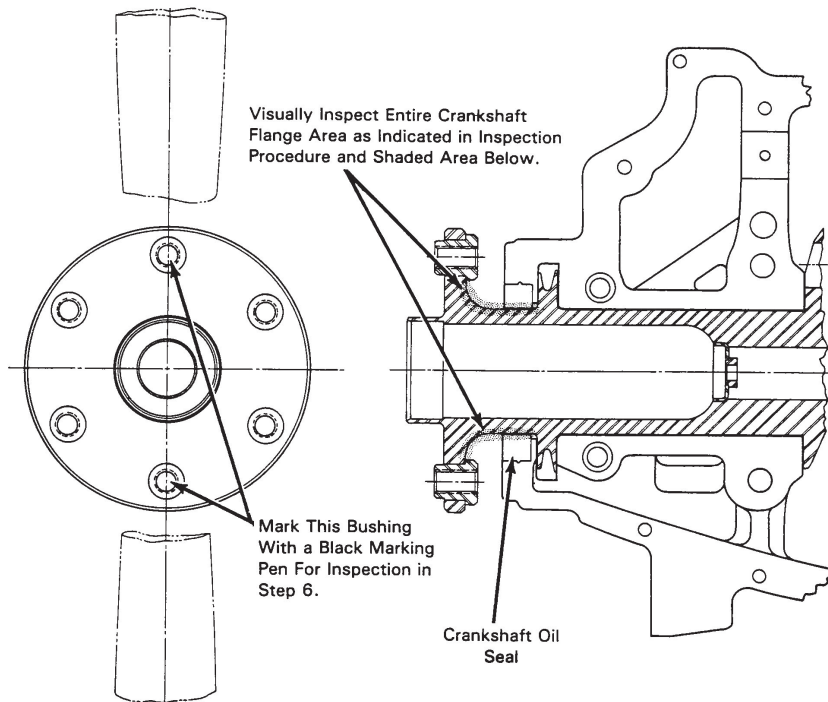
Visual Inspection of Crankshaft Flange Area
